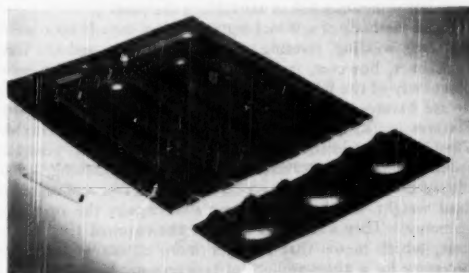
STEEL REFRIGERATION EVAPORATOR PLATE
